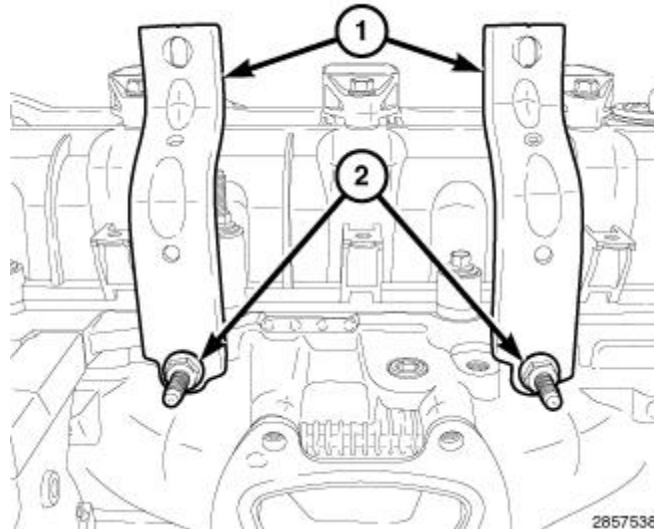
Left Intake Manifold Support Brackets & Retaining Bolts
